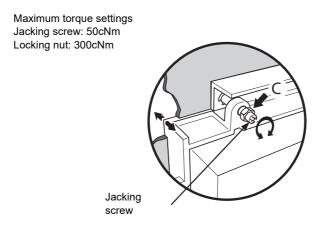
Adjust Each Corner (Large frame unit shown - small frame unit similar)
